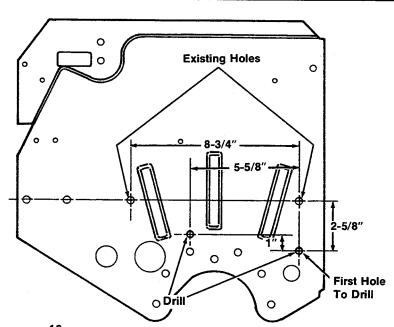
6200/T-800 Series Rear Frame - Left Side View
